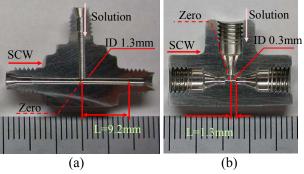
Cutaway view of the T shape mixer (a) STD, (b) LDV
